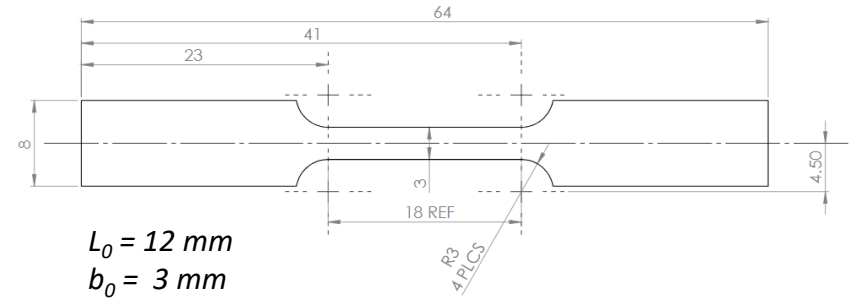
Engineering drawing of the new Mini 1 tensile specimen.
